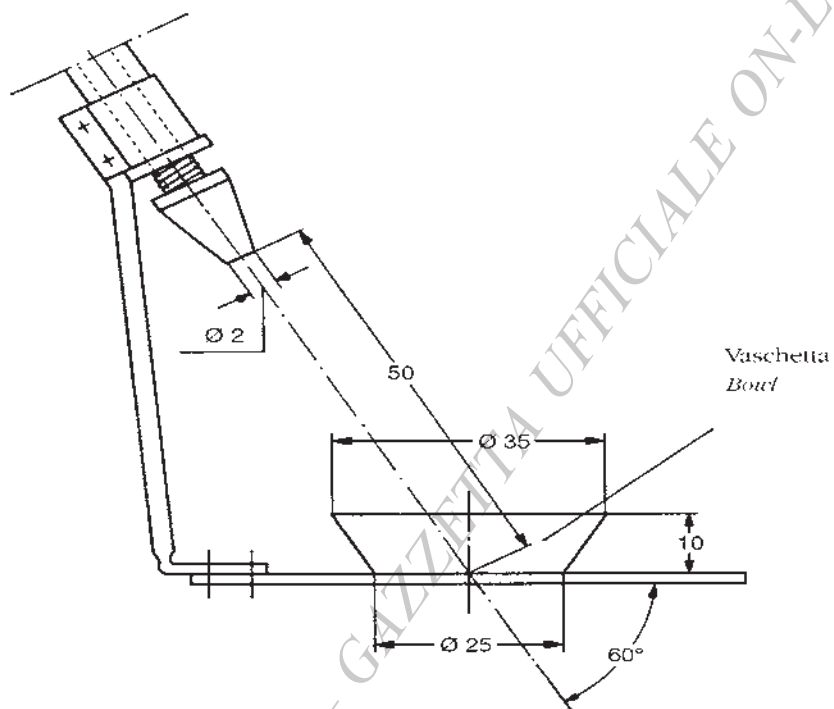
Splash apparatus*Dimensions in millimetres*Apparecchio per la prova di spruzzo*Dimensioni in millimetri
